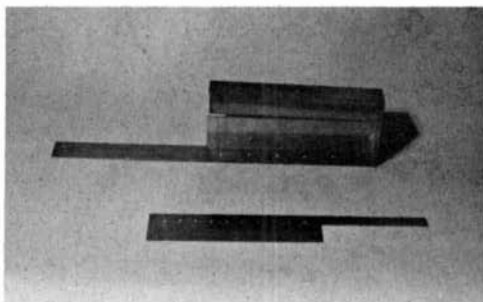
Copper strip is formed into a closed U-shaped box as shown here before installing the center strip and 1-watt resistors.
